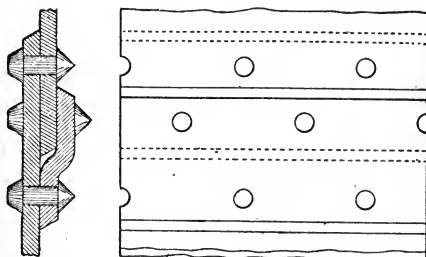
,852 and 3,853.—Single riveted butt and double strap joint.
